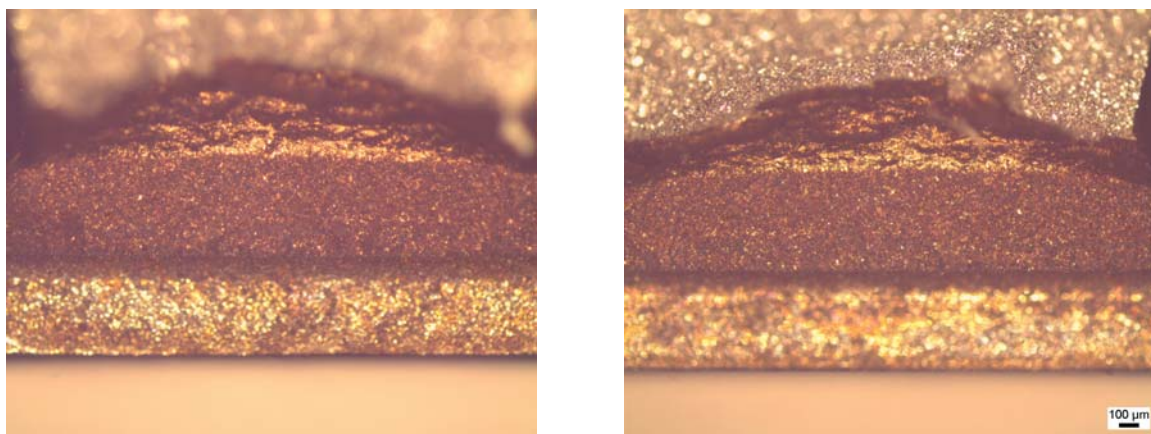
Fracture surfaces of mini-bar EUROFER 97 specimen (EF37); Starter notch type “U”; $a_0/W \approx 0.24$.
